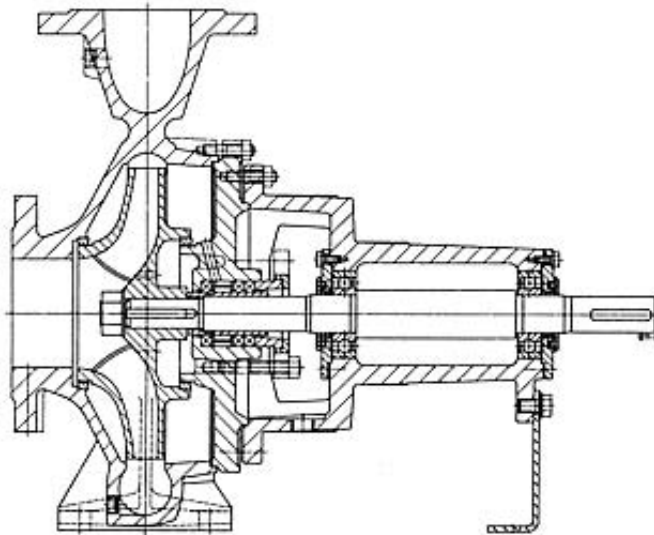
Volute casing pump in accordance with DIN 24255 (see also Fig. 4)
